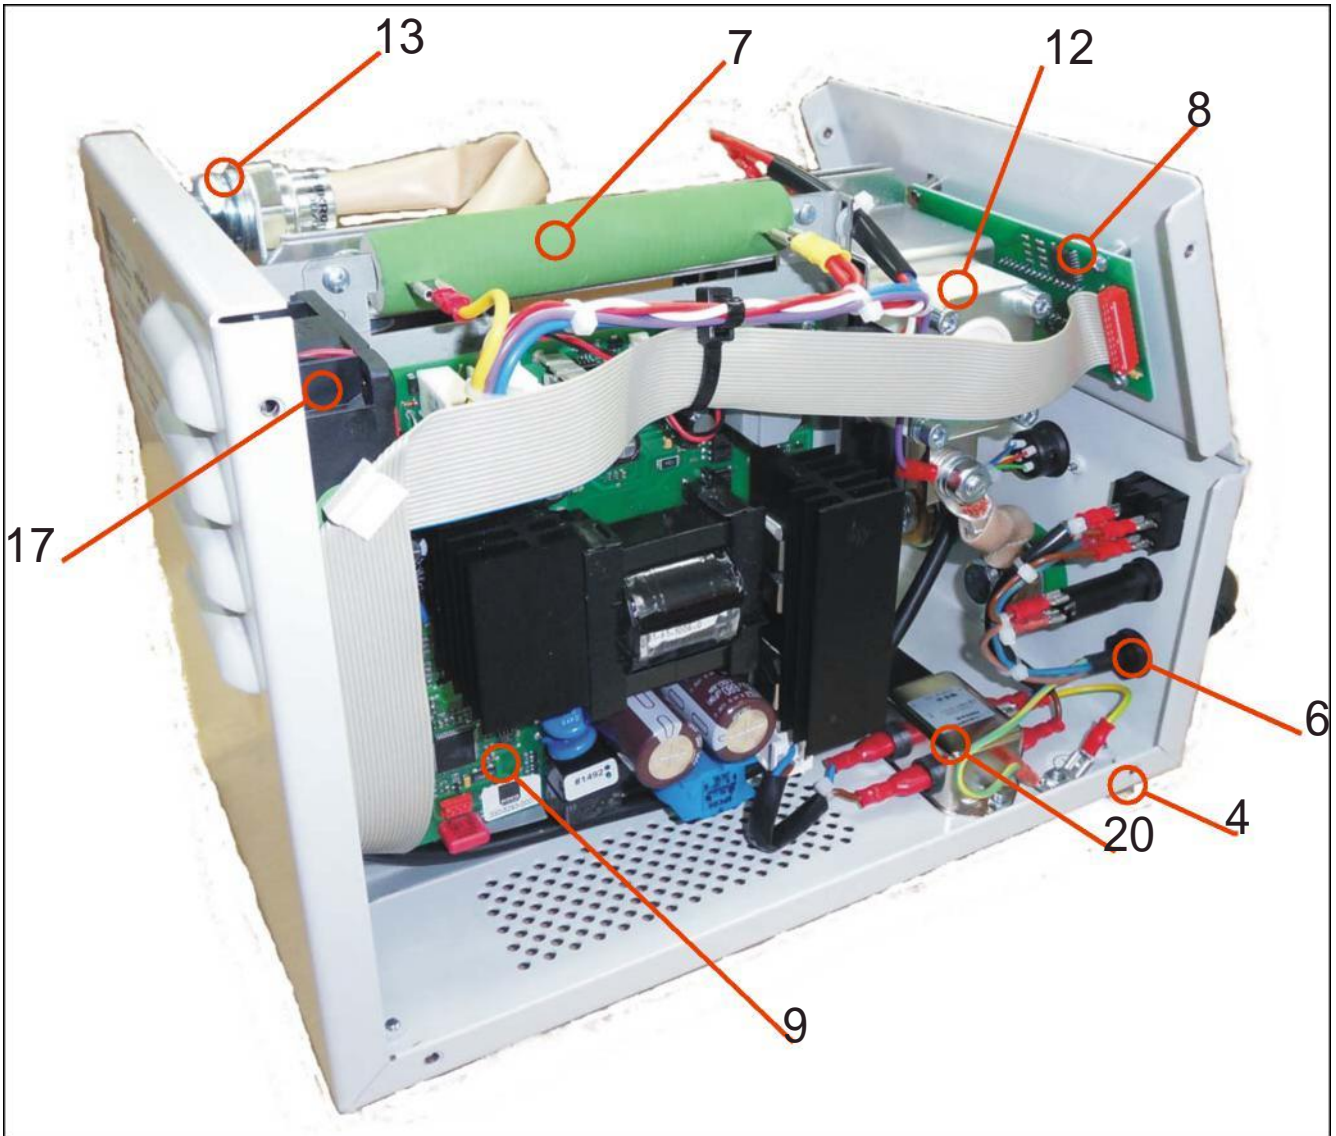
Left-side view (front) of KST 108 with the cover removed
